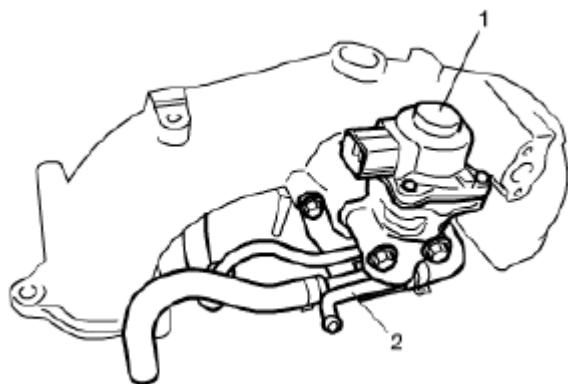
Identifying EVAP Canister Purge Valve Connector
